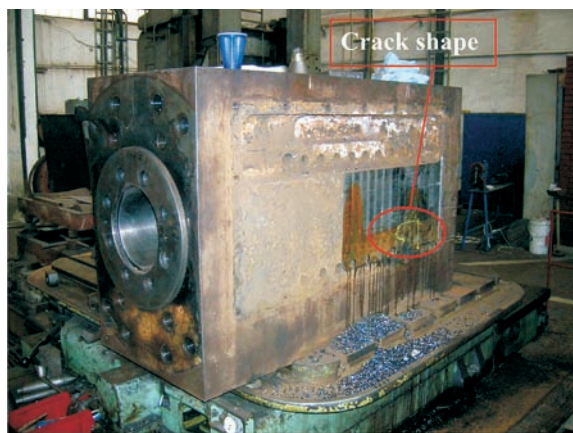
The 3rd stage cylinder and crack shape measured by ultra-sound
